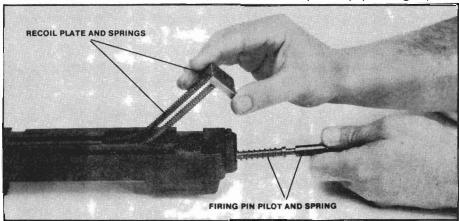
Removing recoil plate and springs, firing pin pilot and spring.
